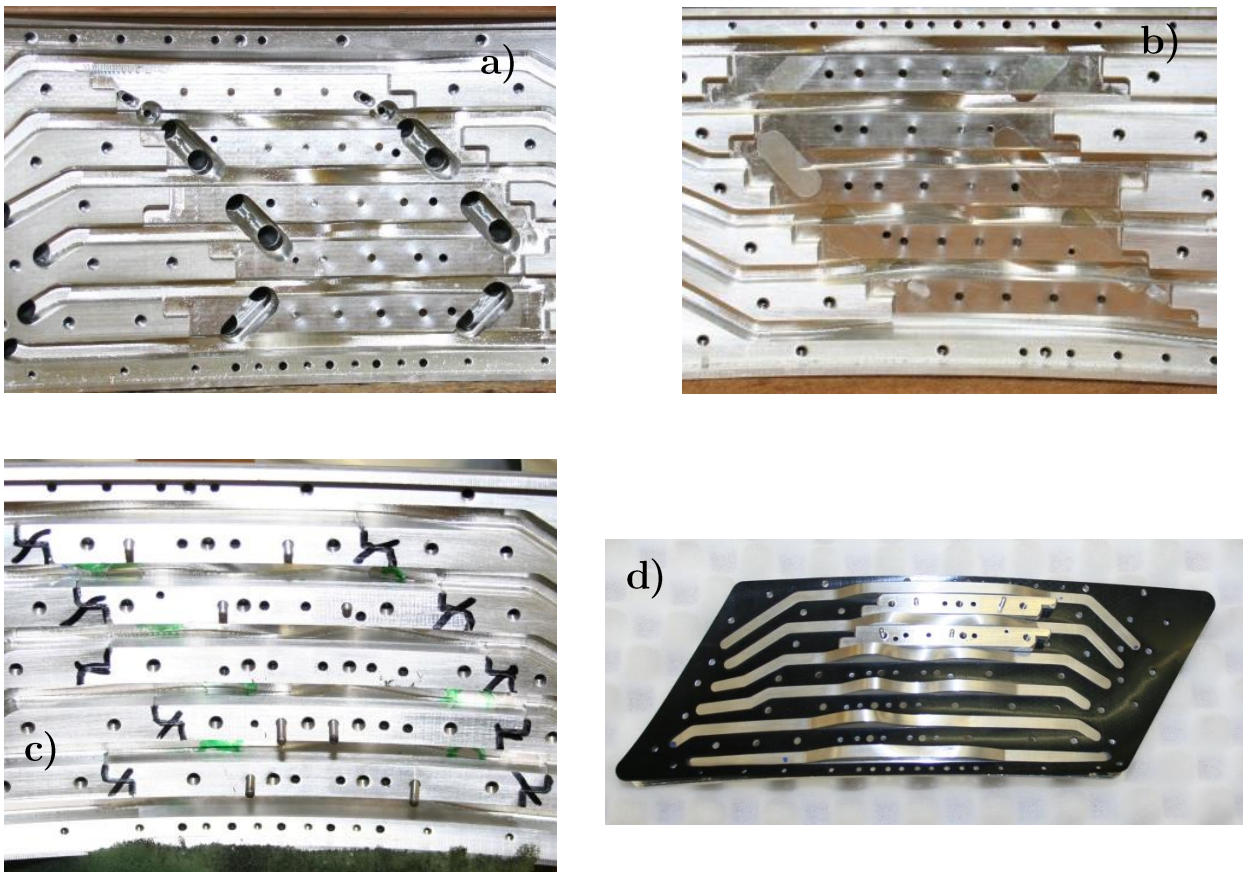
steps in the assembly of the hub section of the stator 2 heat transfer platform.
